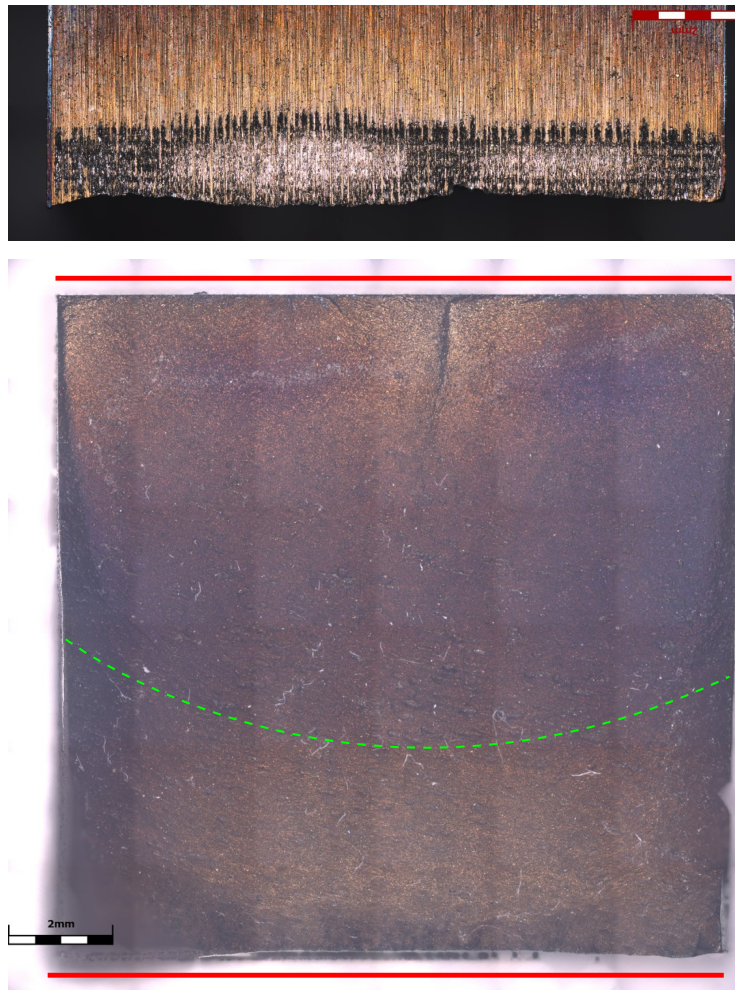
Fretting fatigue contact scar and fracture surface of a test for Inconel 718 at 540°C with constant contact normal load (ff-in-ht-pc-03).
